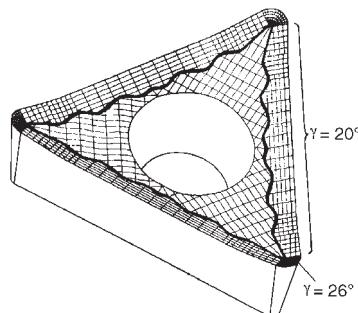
The geometry of a modern turning insert with a chip breaker for machining of aluminium.
